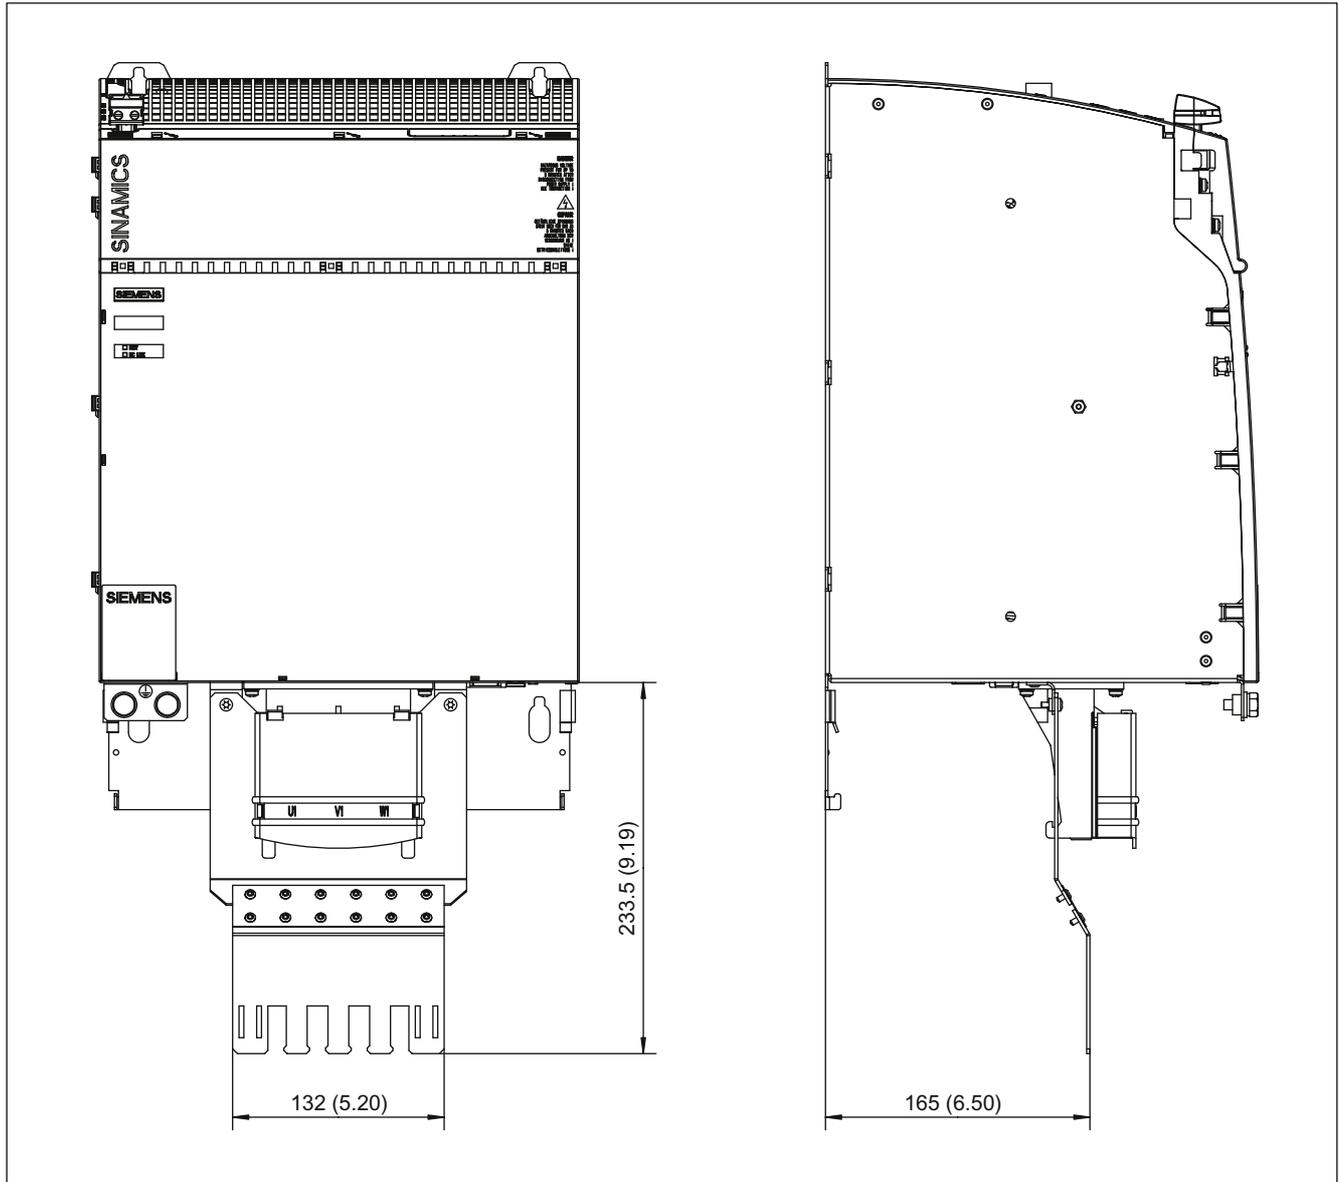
Dimension drawing of shield connecting plate on a 300 mm component with internal air cooling, all dimensions in mm and (inches)
